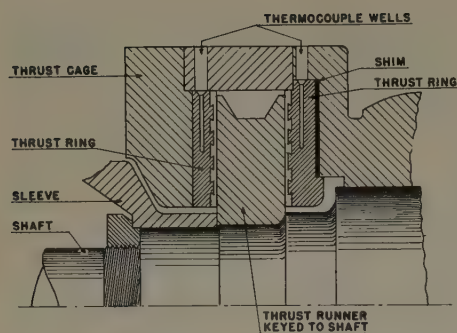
(left). Thrust-bearing thermocouple installation — typical section
